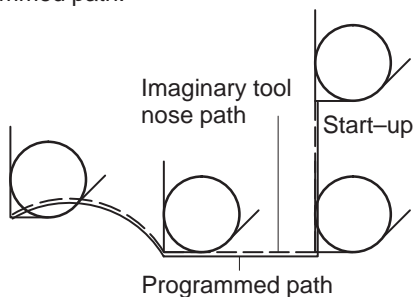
(c) Tool path when programming using the tool nose center
